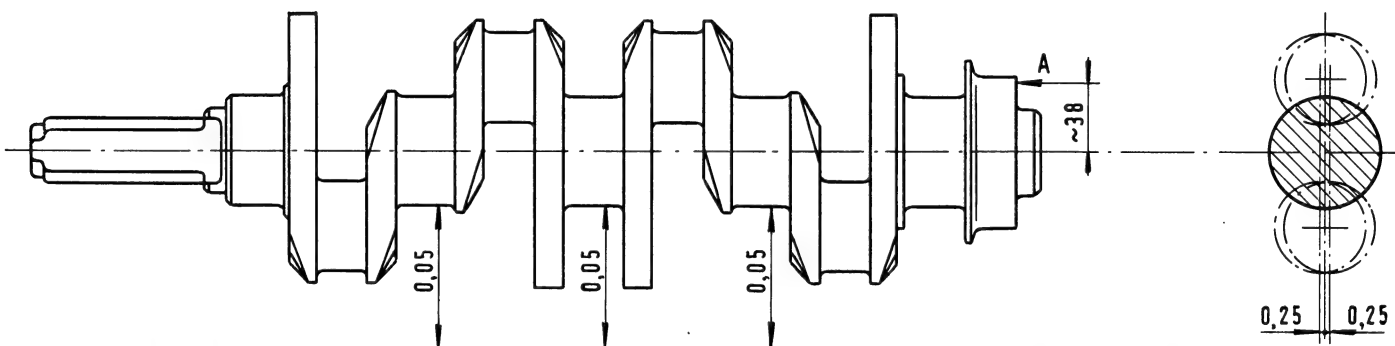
Maximum out-of-true allowances on alignment of main bearing journals and of connecting rod journals to main bearing journal axis; quotation for squareness inspection of flywheel resting face to crankshaft centerline (engine 118 B.000).
